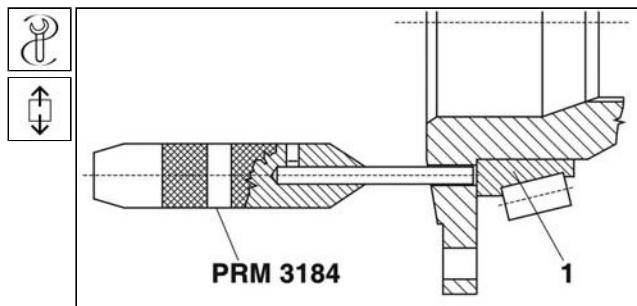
Removal of the front bearing inner race of the crown gear hub
